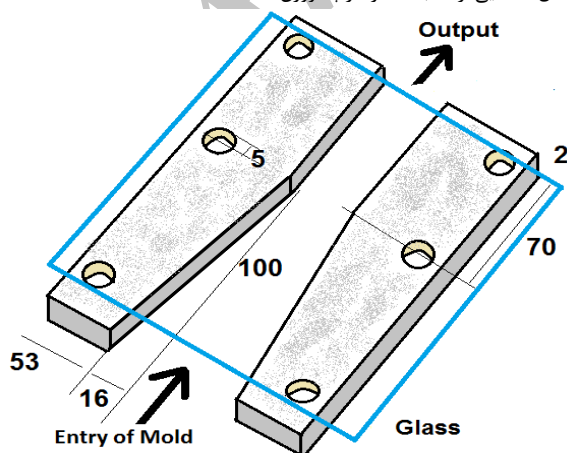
3D View of visualization pultrusion Mold (As Per mm)
